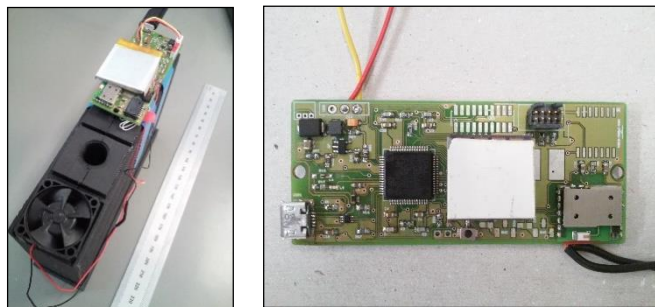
Tube ventilation coupled with the electronic platform (left) and the board assembled on a two layers 80x34 mm<sup>2</sup> standard FR4 PCB with commercial components (right).
